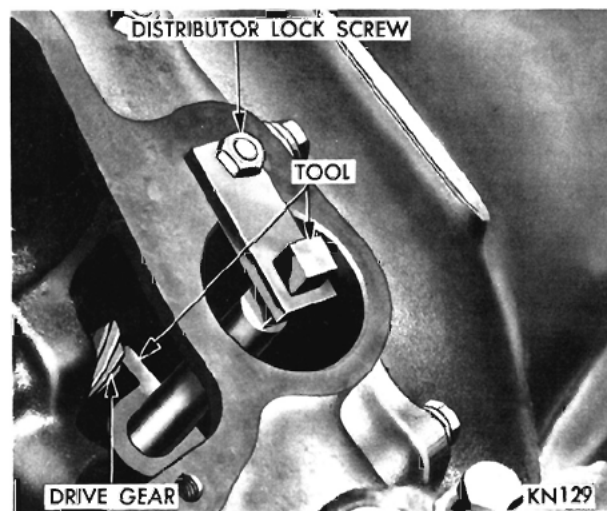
Camshaft Holding Tool C-3509 (273 & 318 Cubic Inch)
